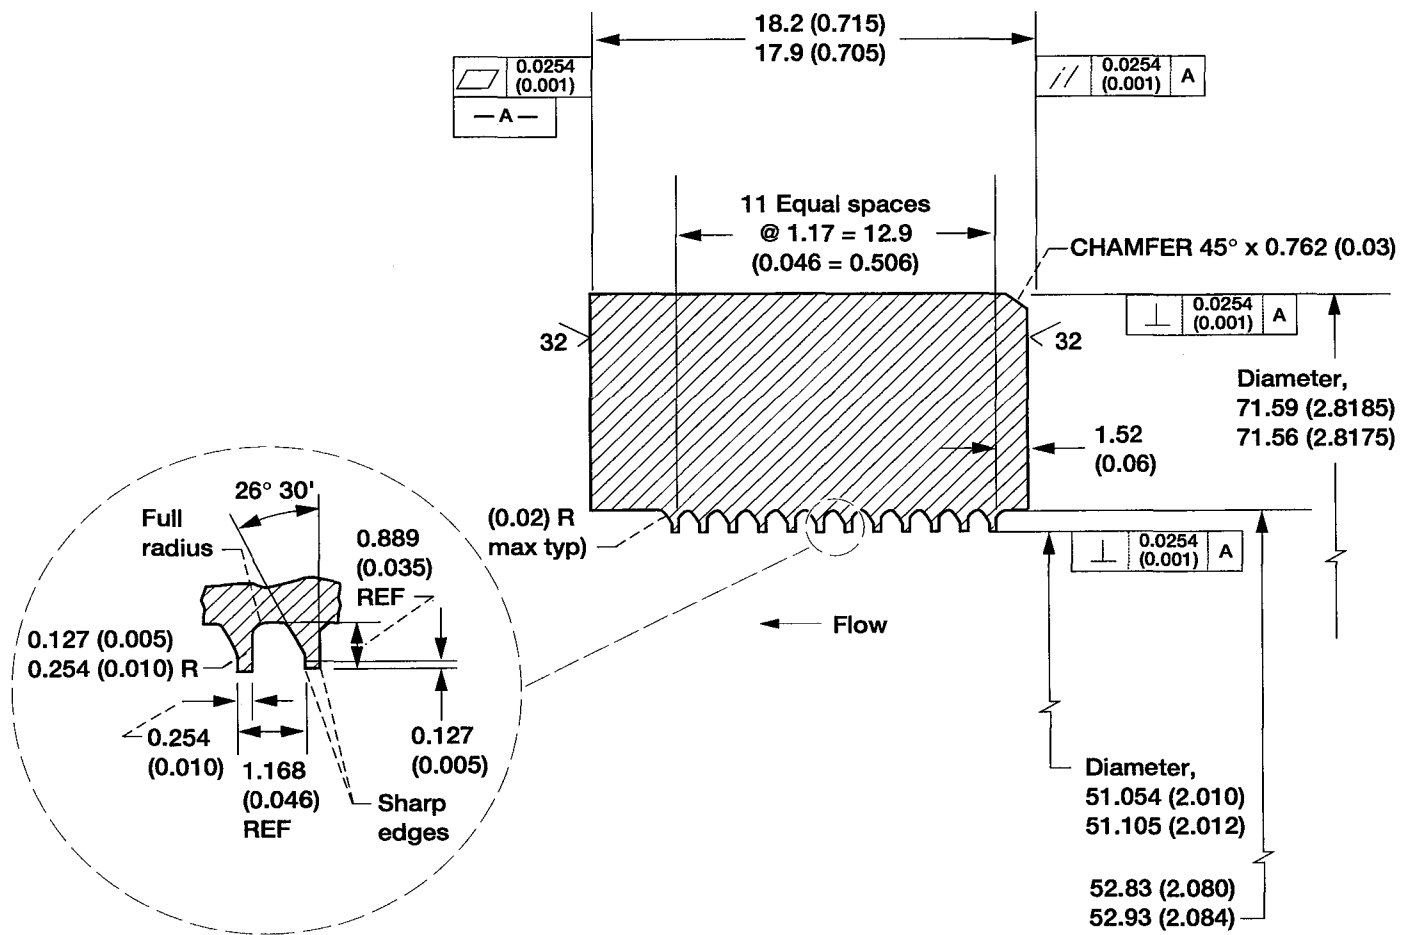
Labyrinth seal geometry; material, Inconel 718. Dimensions in mm (in.).
